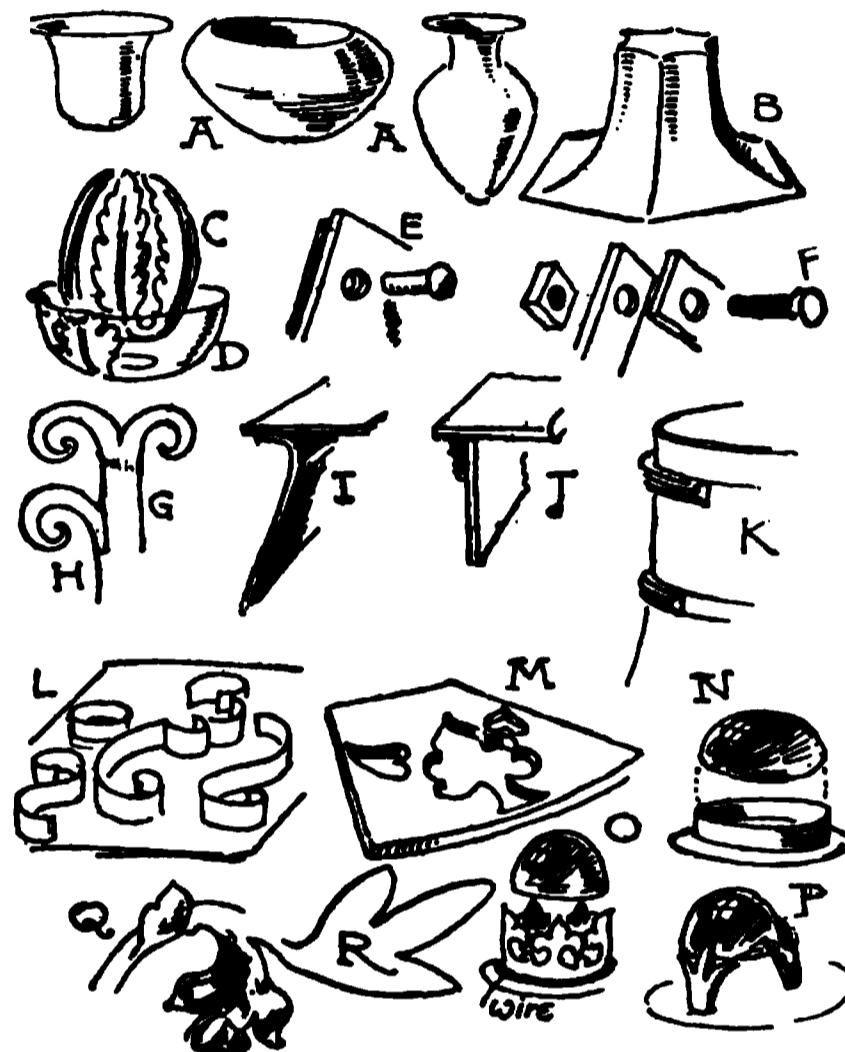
Technicalities of metal-work. A, A, forms raised from the flat by hammering ; B, built form ; C—D, hammered ornament ; E, rivet ; F, nut and bolt ; G, flat rod split at end ; H, curl brazed on ; I, soldered or brazed joint ; J, soldered joint with a wire moulding in the angle ; K, mouldings of wire soldered on ; L, wires bent for *cloisonné* enamel ; M, depressions chiselled out for *champ-levé* enamel ; N, a simple setting for a stone ; O, a setting ornamented ; P, claw setting ; Q, leafage hammered from the sheet R.
